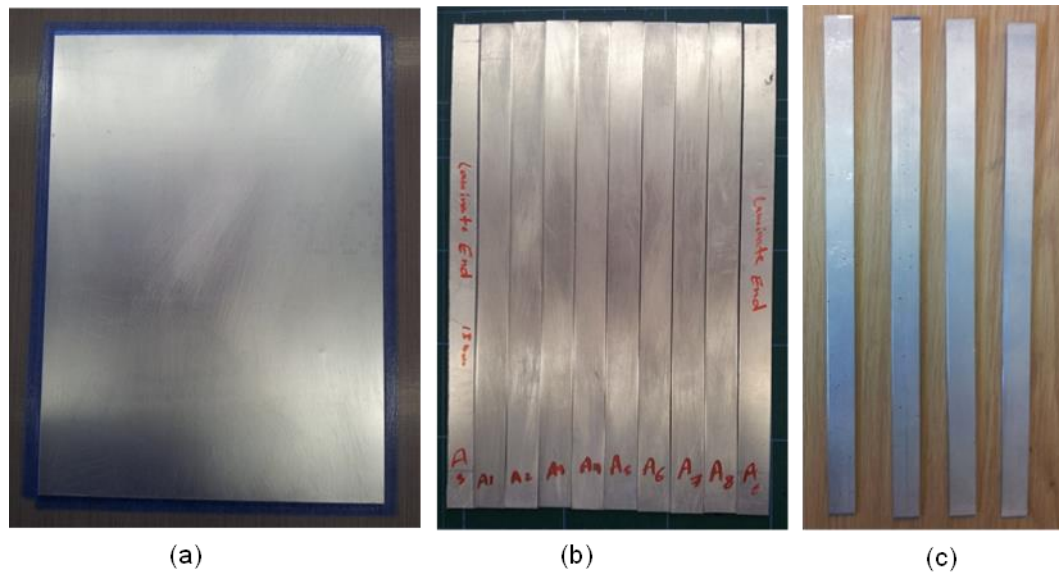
Cutting the Glare[®] panel, (a) pristine panel, (b) stage-1 using the tile cutter and (c) stage-2 using the milling cutter.
